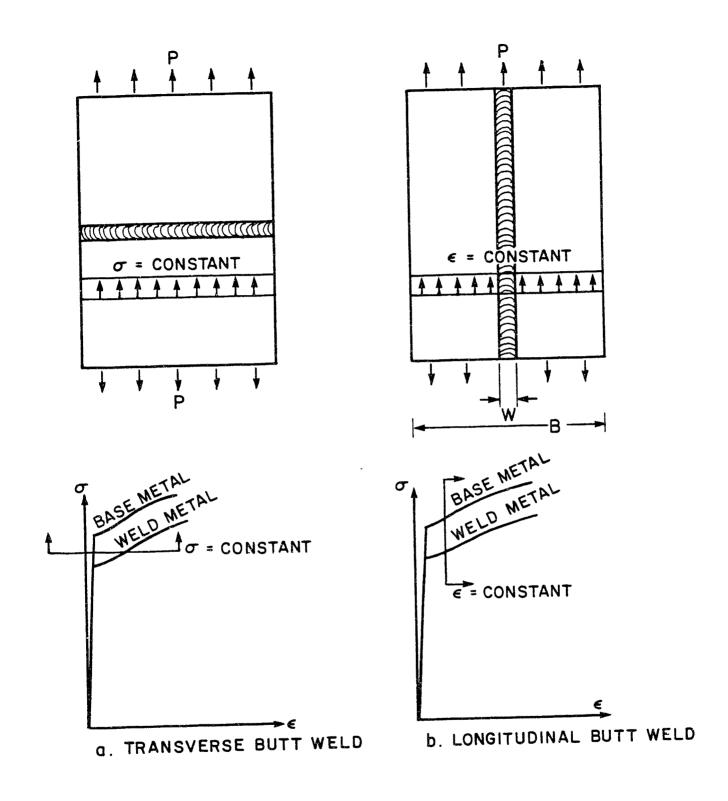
Butt welds subjected to tensile loading, (a) transverse to the weld line and (b) parallel to the weld line.
